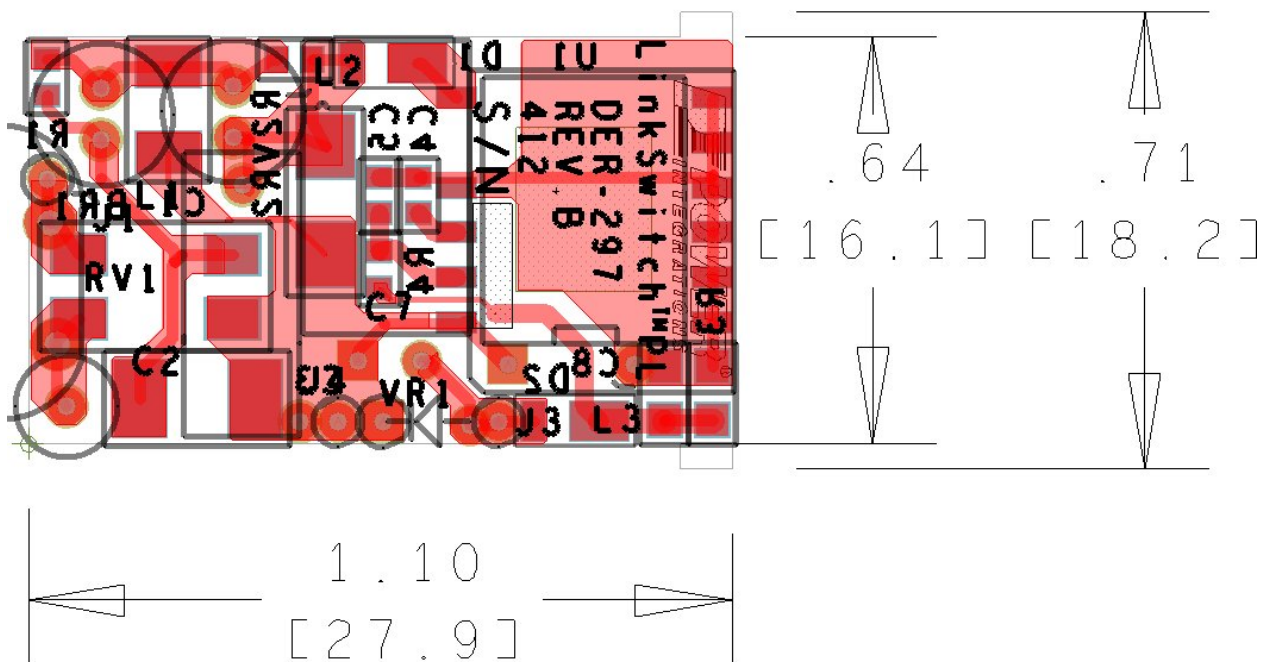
Printed Circuit Layout, Dimensions (in. /[mm])
